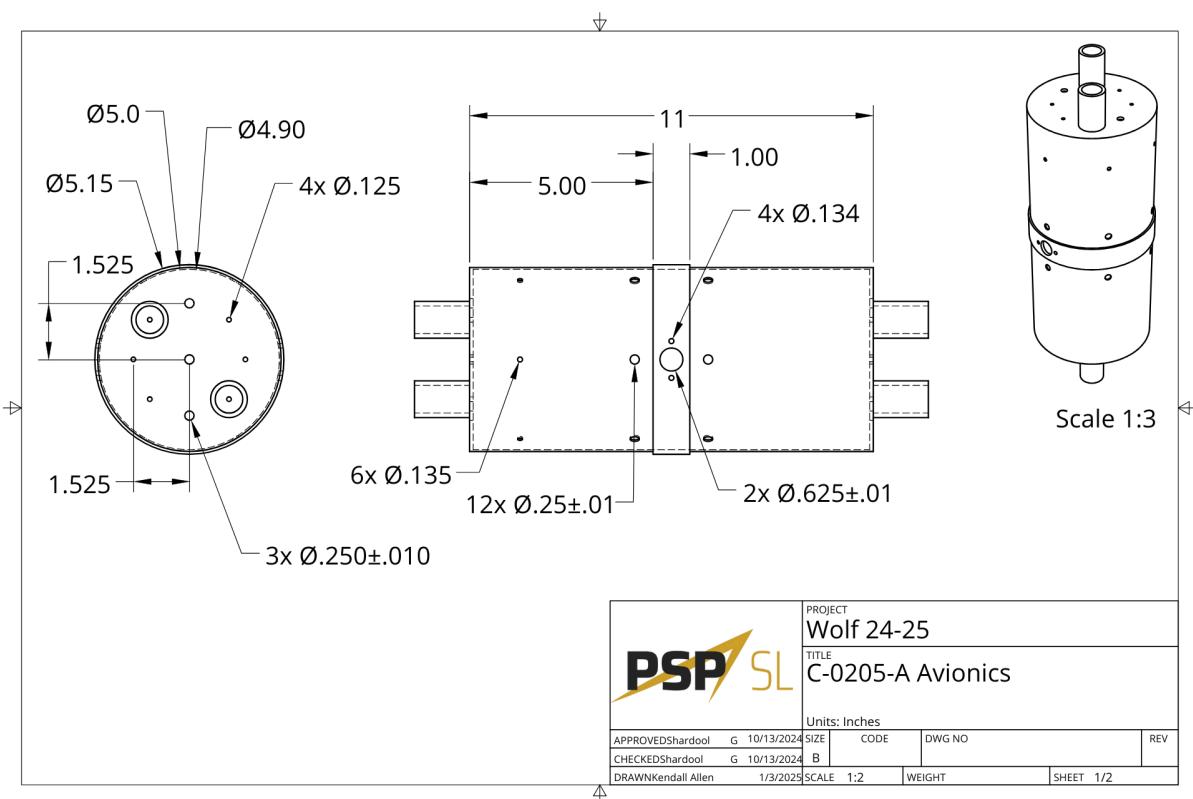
Avionics Coupler Technical Drawing (Sheet 1)
